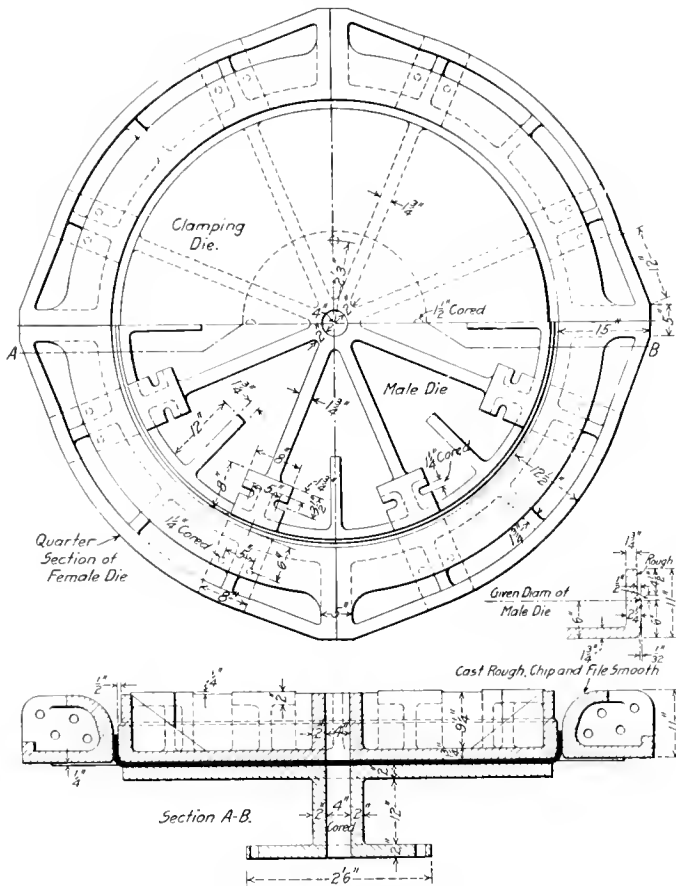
Formers for Pressing Boiler Tube Sheets.
